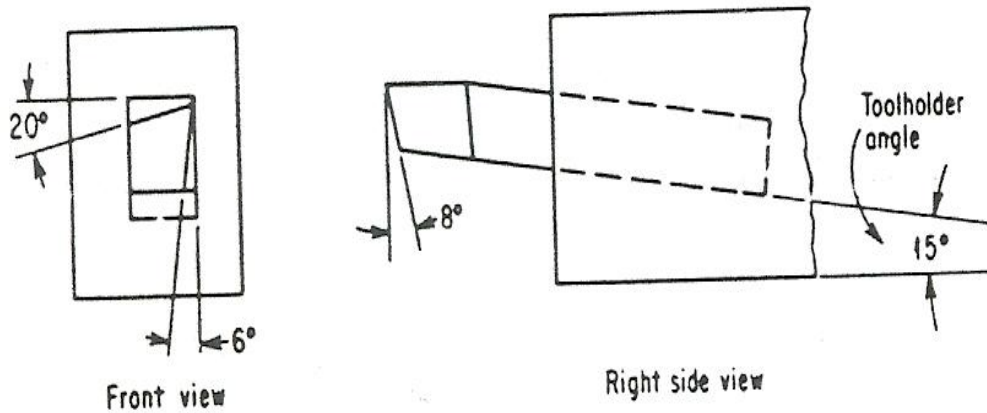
A right-cut, single-point tool mounted in a 15-deg toolholder. Note that the tool signature lists the angles that result when the tool is clamped in the holder.
